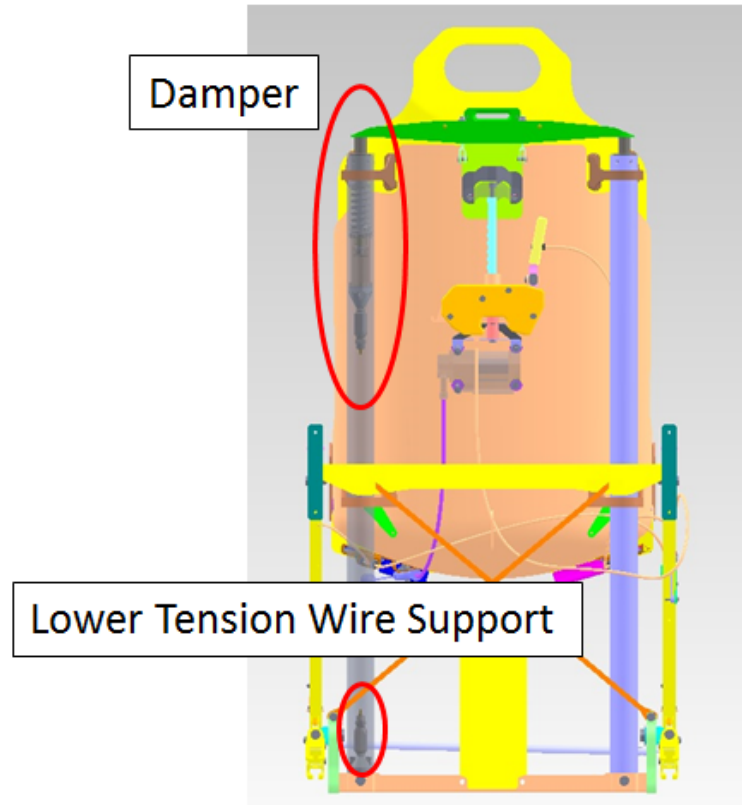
MR Damper Mounting with Lower Tension Wire Support
